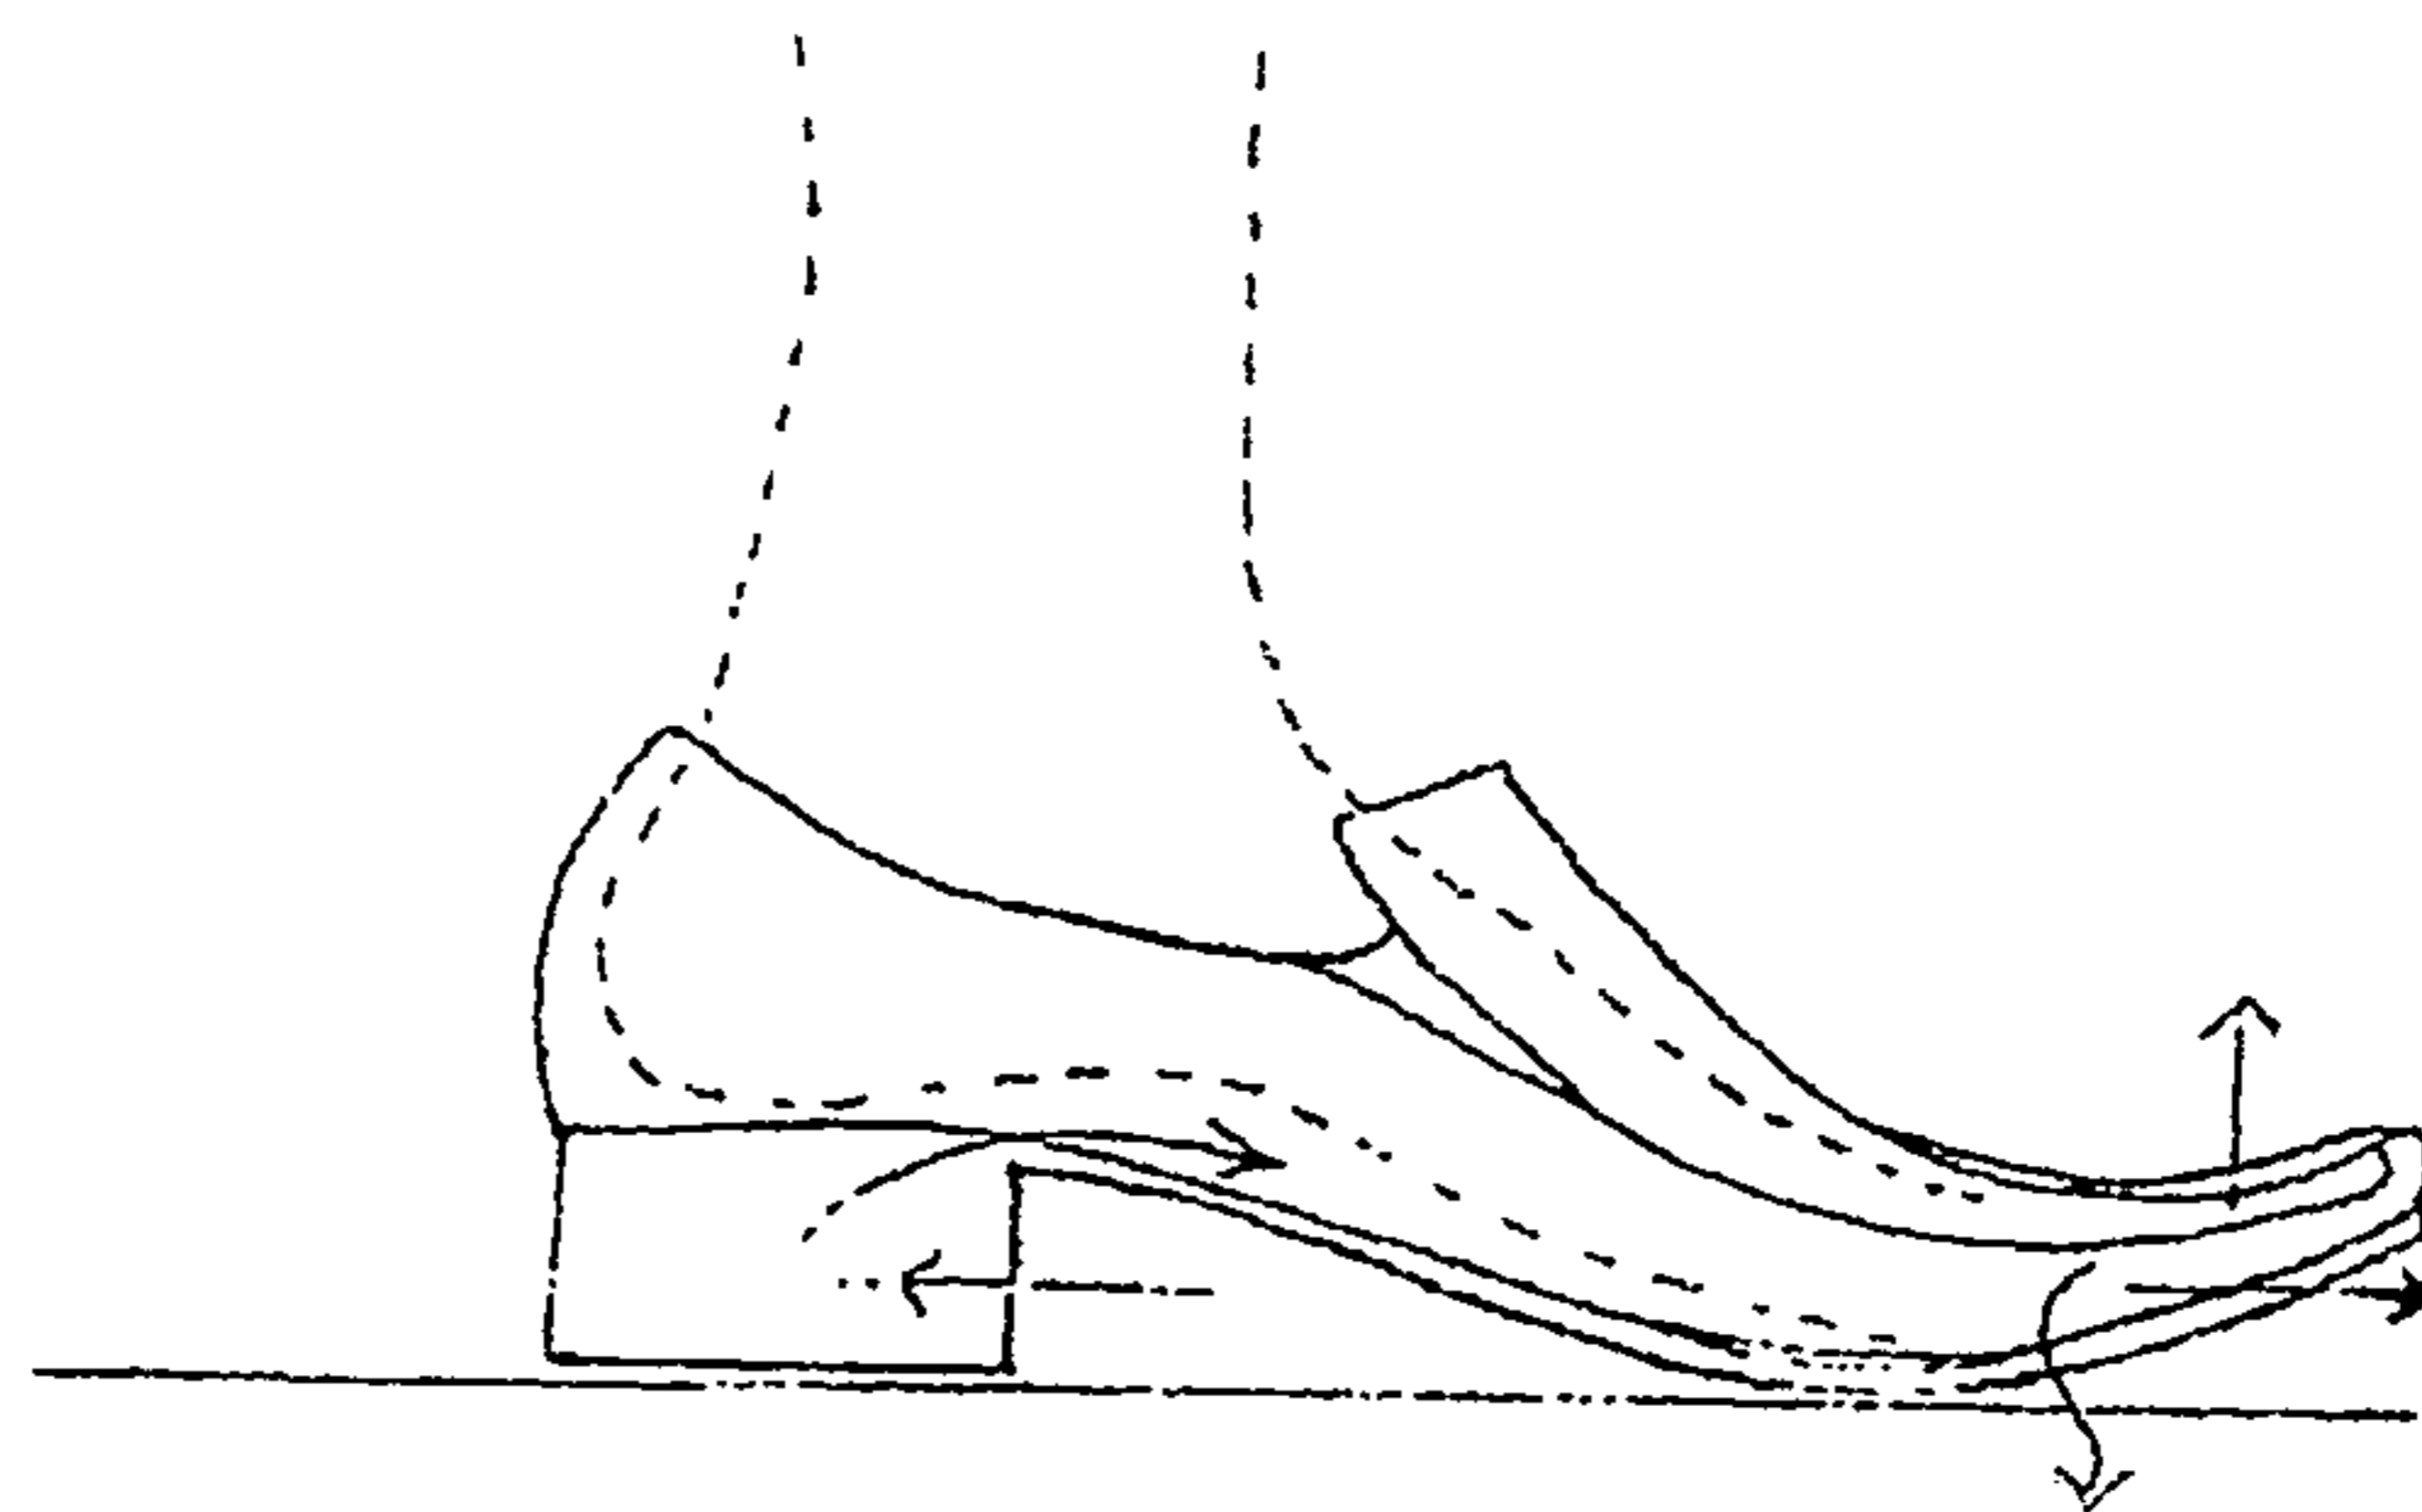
Side elevation view of a typical loafer type shoe showing the air inlet and 3 possible outlet exhausted air pathways
